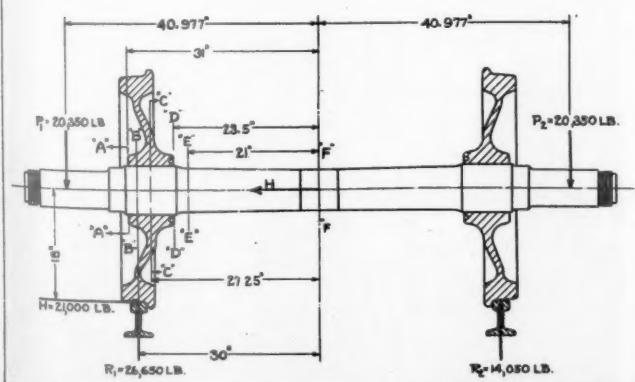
Axle-stress calculations for outboard-bearing axle under the loading shown
